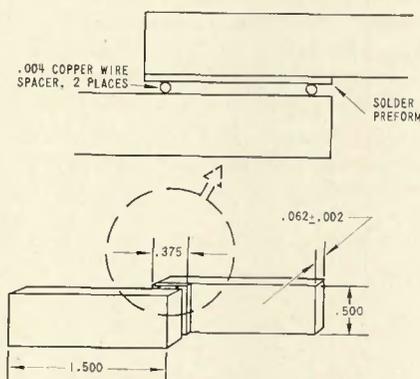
Dimensions and assembly of lap shear-strength specimens
